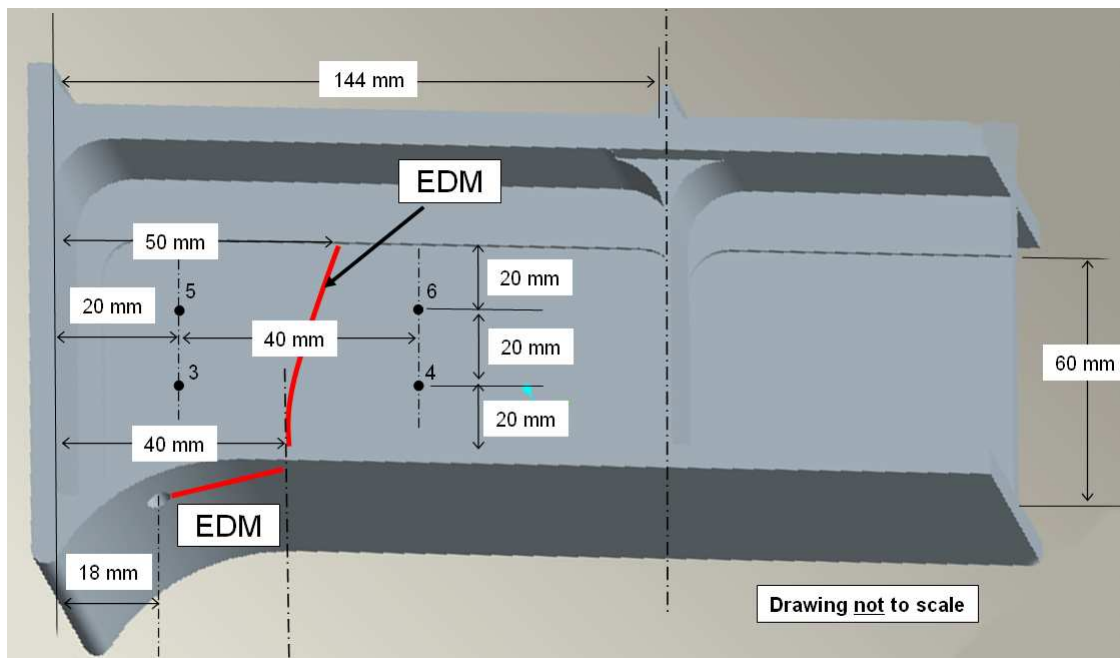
F-15: schematic of aluminum F-15 specimen and sensor placement
